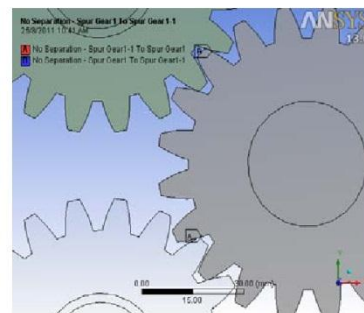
Detailed side view of the double pair tooth contact between two gears.
